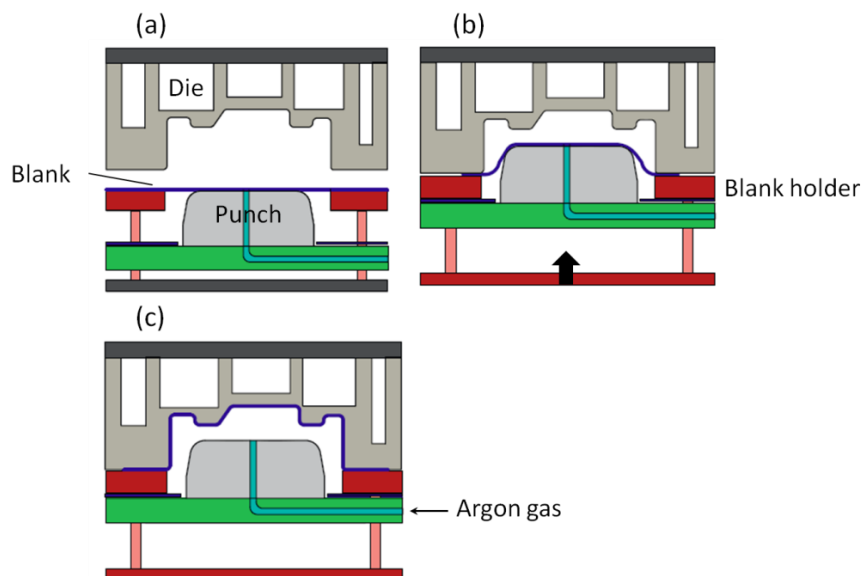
Schematic of the hot draw mechanical pre-forming process: (a) loading and sealing, (b) hot drawing and (c) superplastic forming [138].
